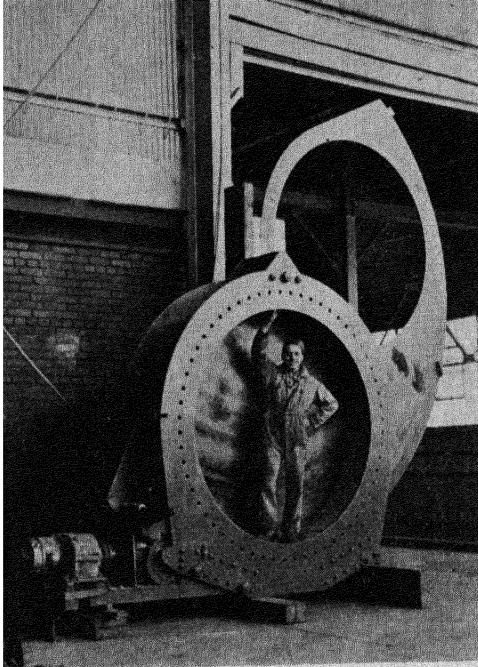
Automatic motor driven goggle valve (courtesy of Equi B. Brosius, Inc.)
